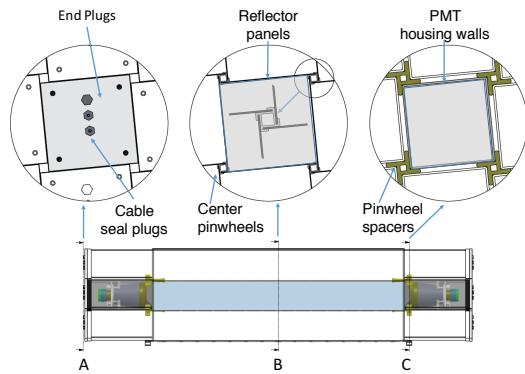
Three complete segments, including PMT housings at each end with reflectors kept in place between segments by pinwheel rods.
